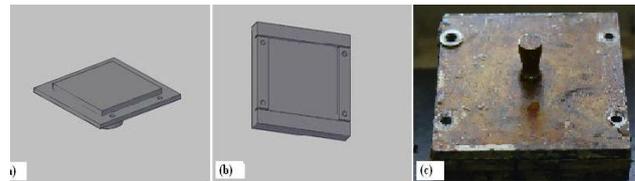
Schematic of metallic mold (a) Male part, (b) Female part and (c) Picture of the fabricated mold
